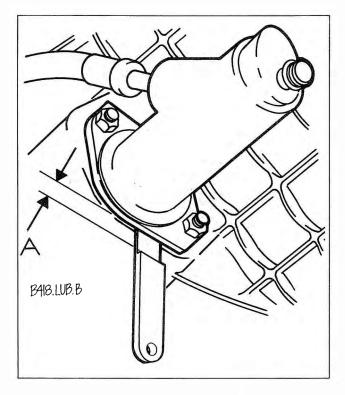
Clutch disc being checked for wear using special tool. If gap of more than 5 mm (0.2 in.) exists (dimension A), the clutch disc is excessively worn and should be replaced.
